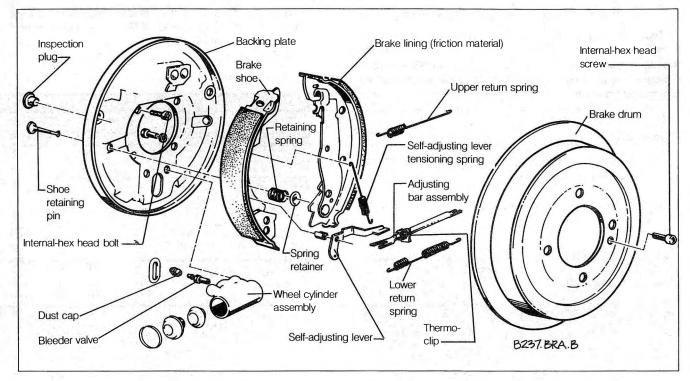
Exploded view of rear drum brake assembly (318i).
